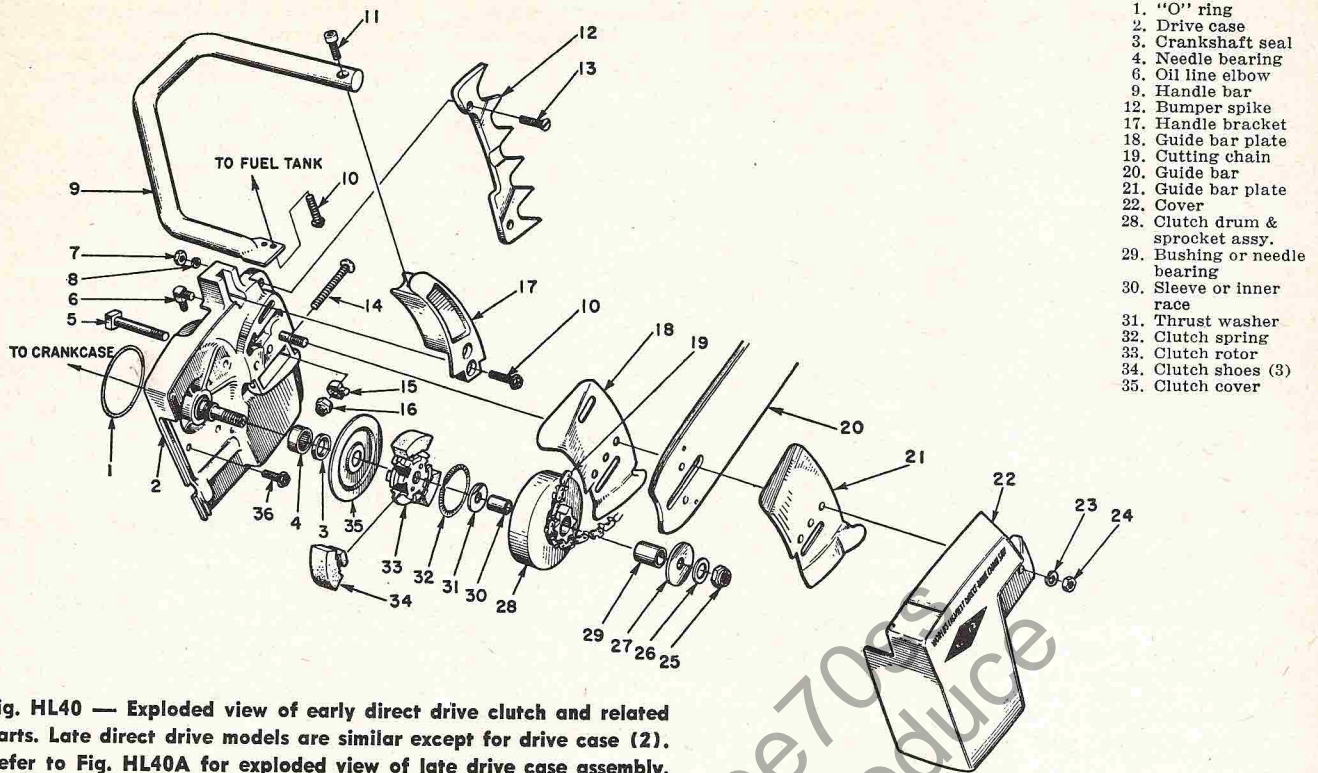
Exploded view of early direct drive clutch and related parts. Late direct drive models are similar except for drive case (2). Refer to Fig. HL40A for exploded view of late drive case assembly.
